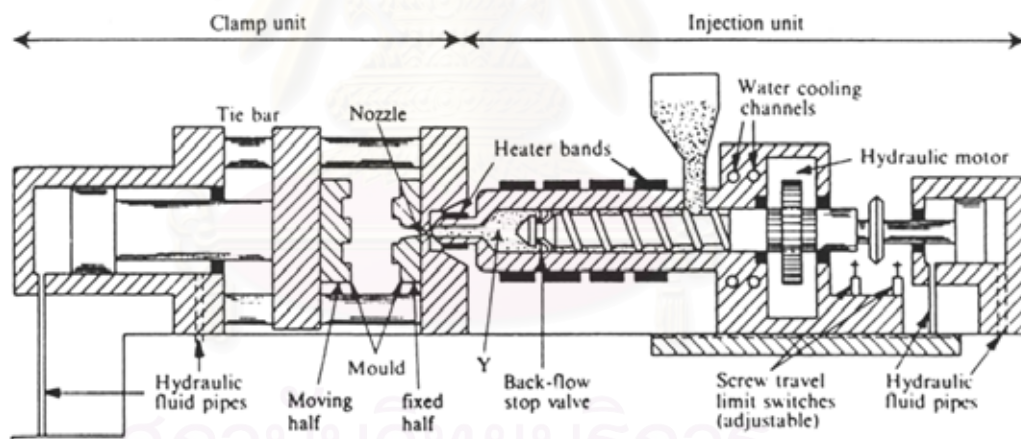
A reciprocating screw injection machine [McCrum *et al.*, 1988].
